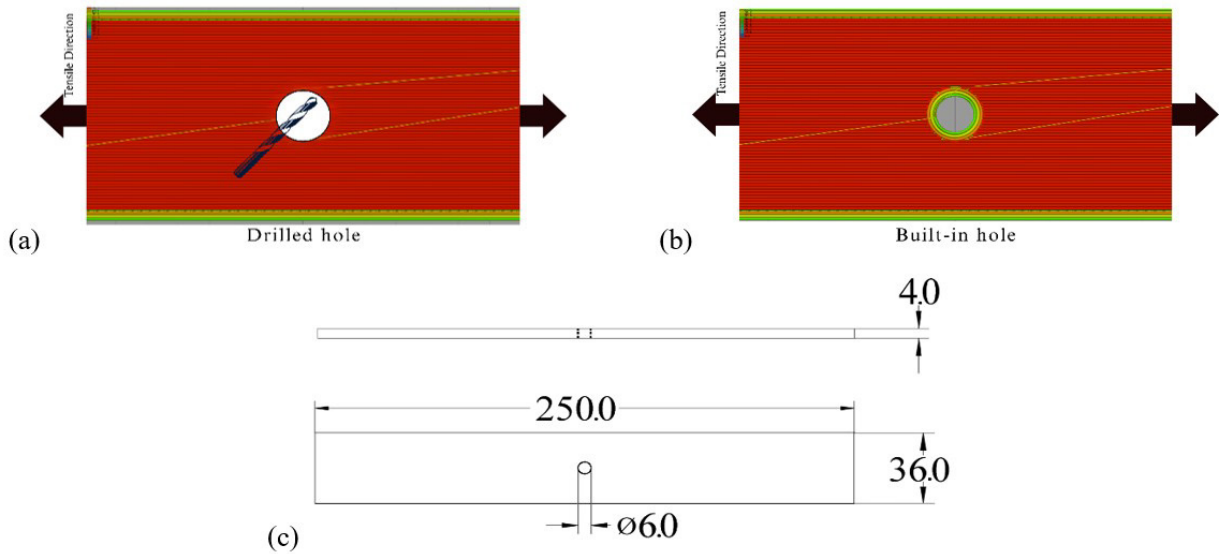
(a) Specimen with a post-process drilled hole; (b) specimen with an as-printed built-in hole; (c) technical drawing of the ASTM D5766 compliant specimen with all dimensions shown in millimeters (mm)
